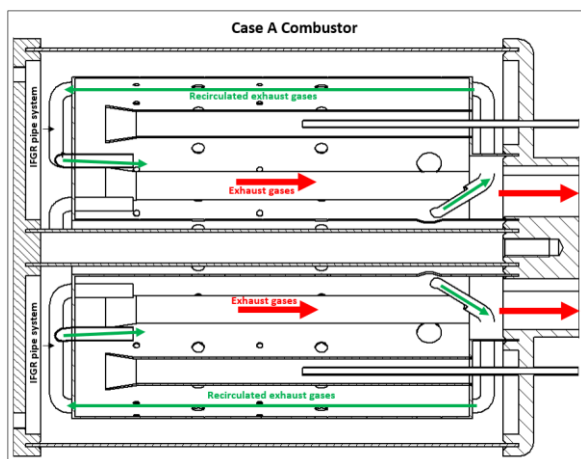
Cross sectional view of 3D model of modified combustor (case A)
